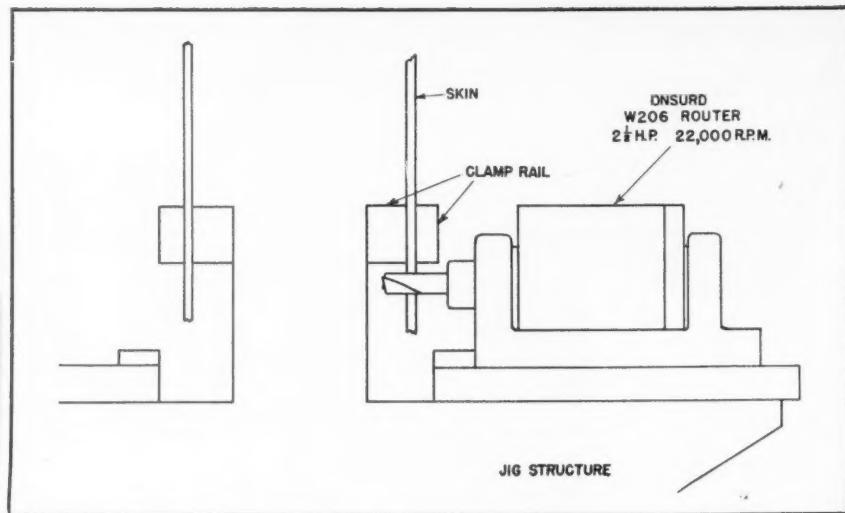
Fixture for cut-routing with cutter perpendicular to sheet.
